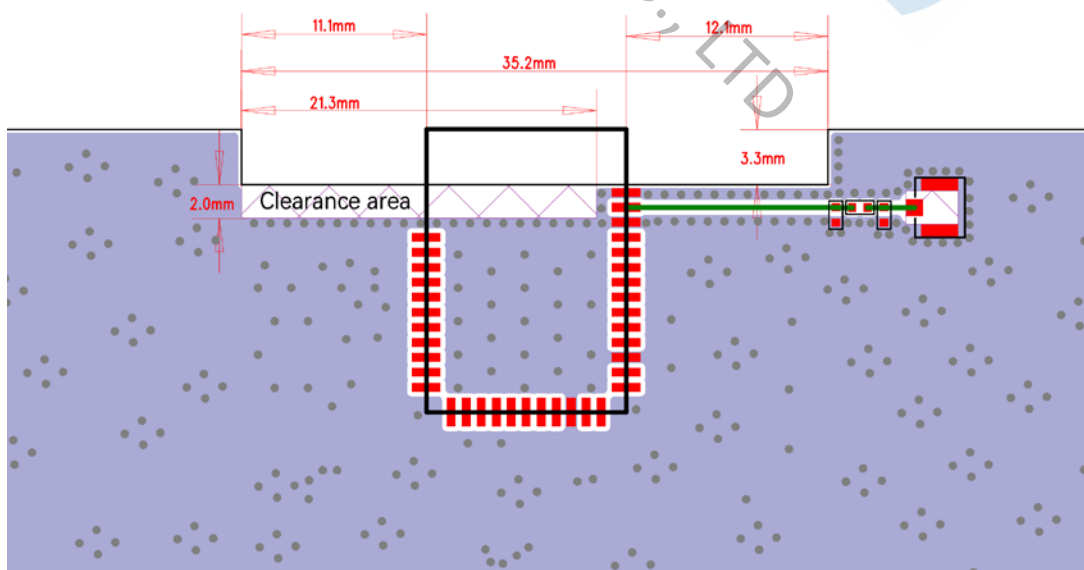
Module Layout - Baseboard TOP Layer
